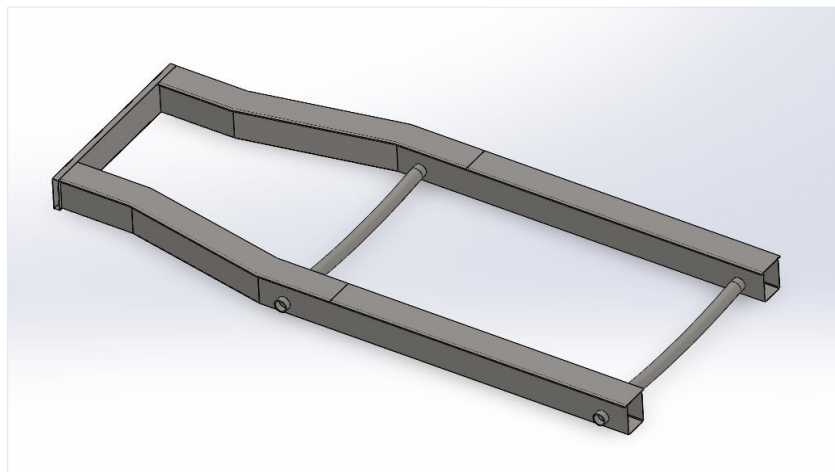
3D CAD model of Rectangular Cross Section Chassis
